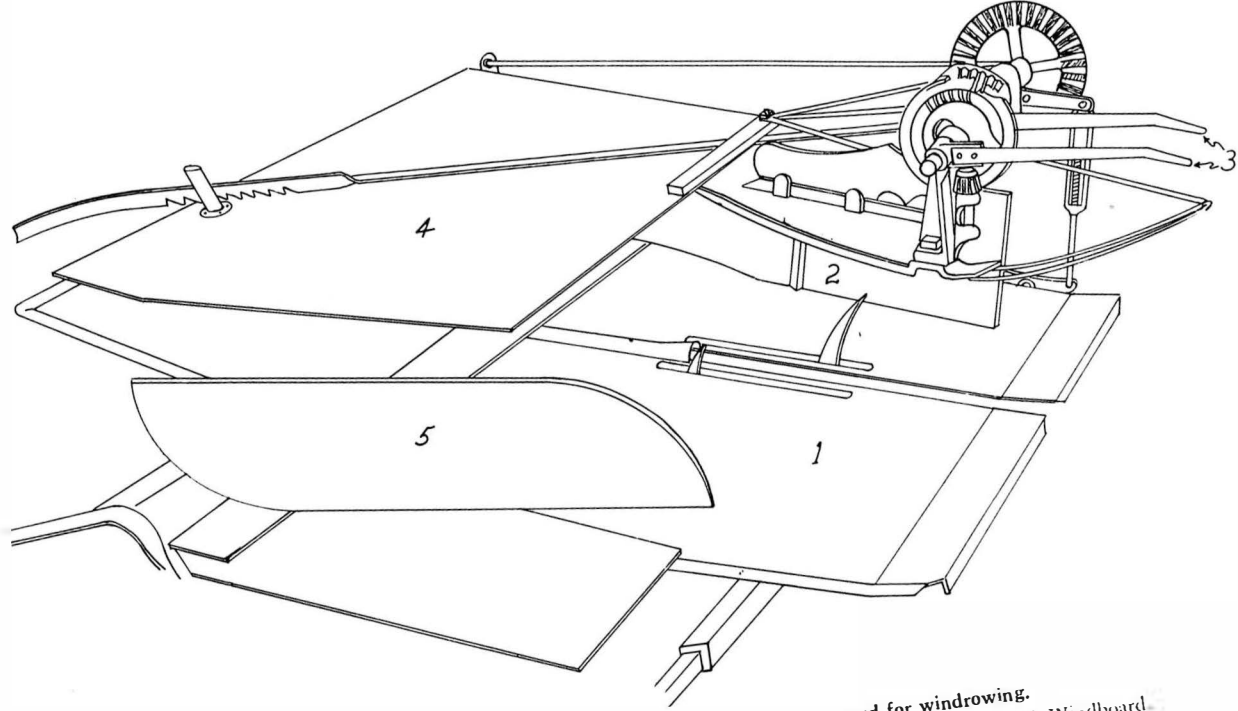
Binder deck with retarding springs and trip arm removed for windrowing.
